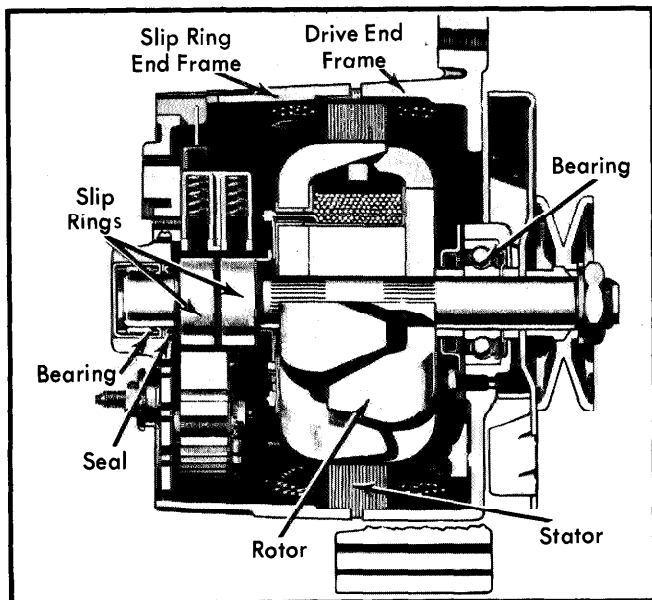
Cutaway View Showing Internal Components of Delcotron 10 SI Alternator With Integral Regulator
